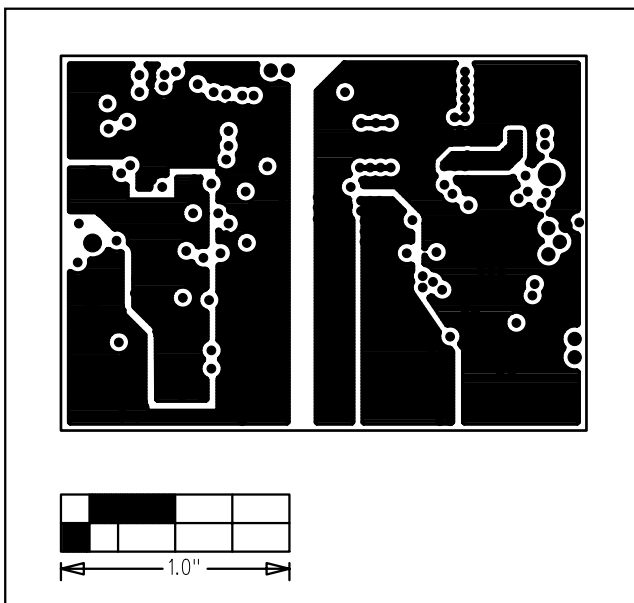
MAX5058 EV Kit PC Board Layout—Inner Layer, GND Plane
